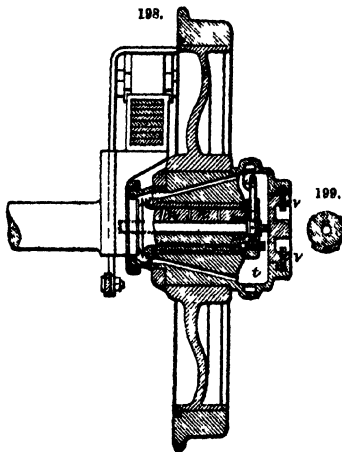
is a vertical section of a railway wheel and axle. The wheel boss is forced into the wheel by hydraulic pressure, a wrought-iron ring being then shrunk on. The nave is in front, surrounded by a concentric case, closed oil-tight by an end cover *v*, the space *t* between this case and the front part of the boss forms the oil-supply or centrifugal chamber. At the back or inner side of the wheel boss there is another concentric, but smaller, casing, closed oil-tight by a packing ring forming joint with the axle, the space within forming the oil-collecting chamber. The oil supply chamber *t* and the oil-collecting chamber are united, by one or more passages sloping from the latter to the former. The collecting chamber is made sloping inside, increasing in diameter towards the opposite side of the wheel, and the slope of the connecting passages to the front or centrifugal chamber *t*, is made less than that of the oil-collecting chamber. The axle is formed with a central chamber, which may be filled with a filter or filtering appliance. The central chamber in the axle communicates by a passage with a catch tube fastened to the axle itself, or to a ring or disc screwed on to the axle. This tube reaches nearly to the greatest inside diameter of the supply chamber *t*, placed in a vertical position. Its mouth is splayed in both directions of revolution of the wheel, it has also a catch basin *b* beneath the mouth communicating with the interior of the tube. The central or filtering chamber is connected by several holes *n* with the journal to be lubricated.
